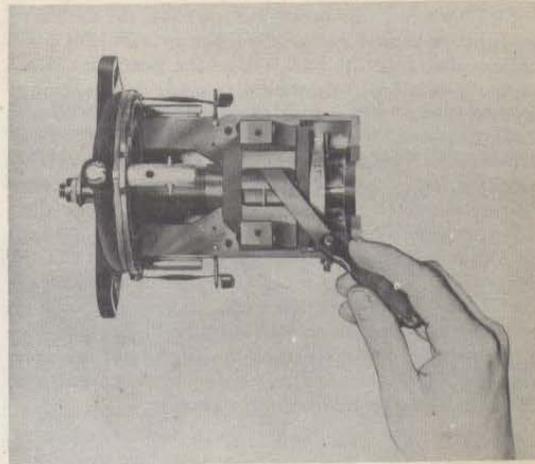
Checking Clearance Between the Rotating Magnet and the Pole Shoes
